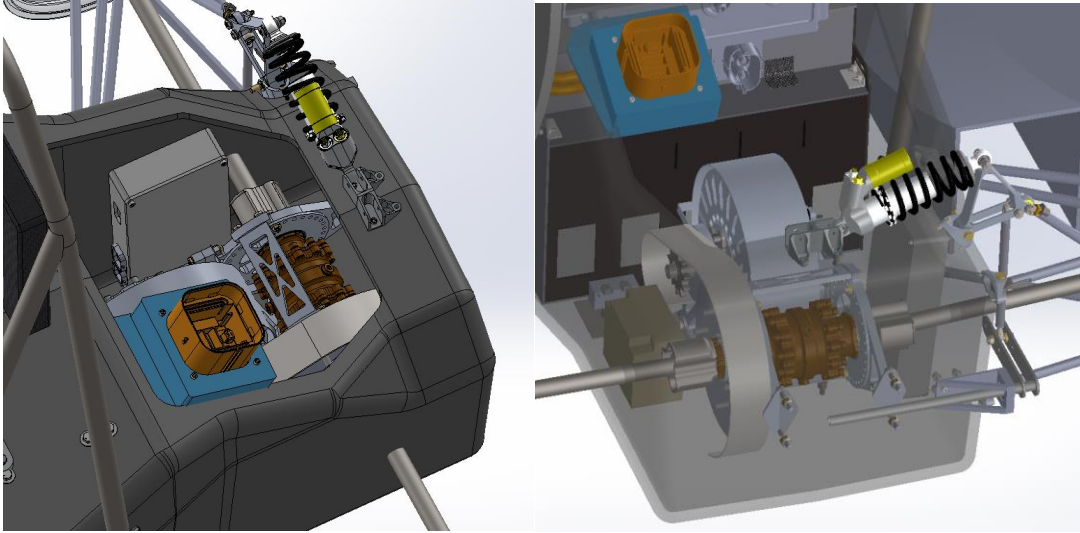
Battery box, motor, and drivetrain packaging in electric car.
